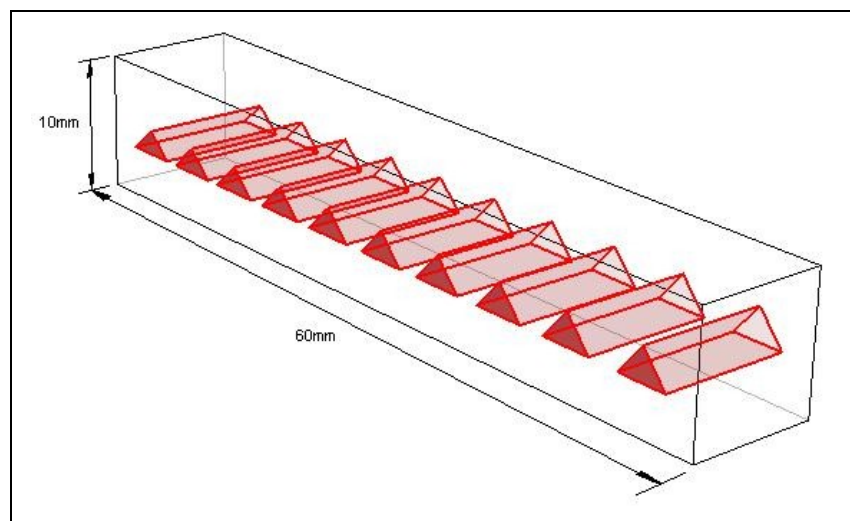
Isometric view of the horizontal hole test plate including holes (shaded red) under test
